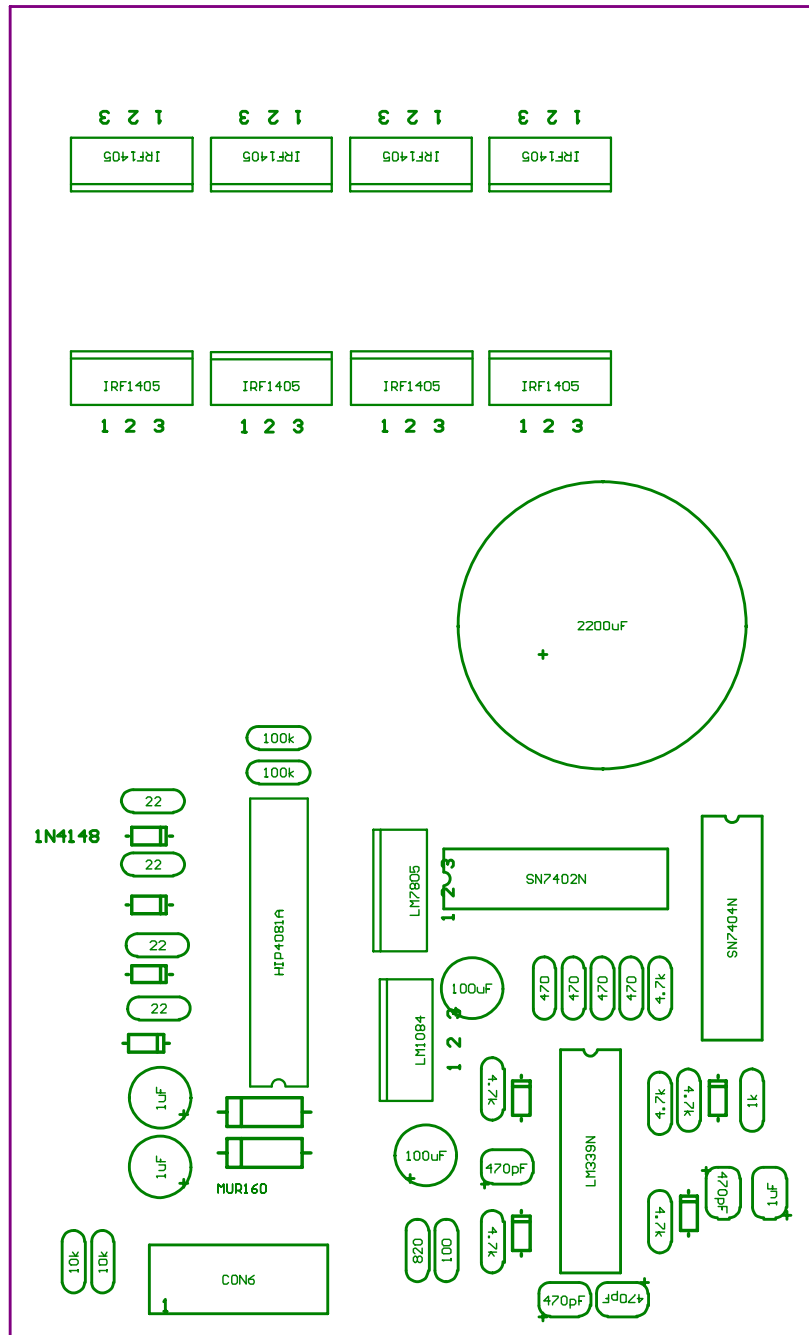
Final H-Bridge PCB Top Solder Mask Layer (Not to Scale)
